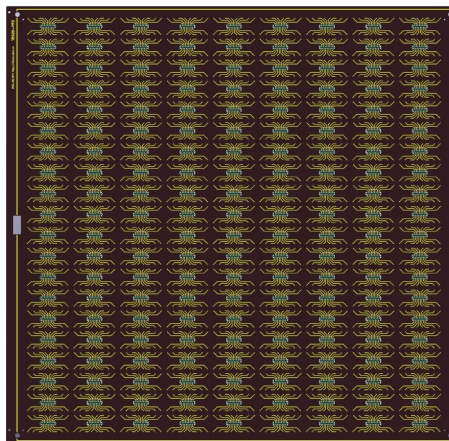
The new design should also improve the manufacturability of the pad-plane.
